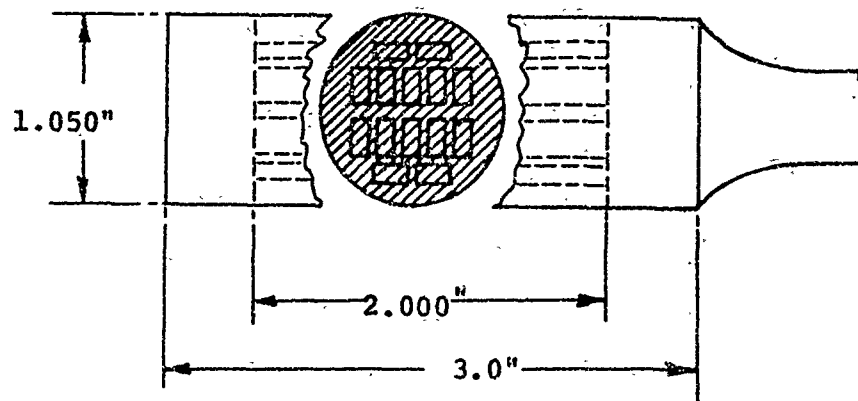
Cutting Plan for Ends of Blanks 3A05-024, 3A05-025, 3A05-028, 3A05-031, and 3A05-035 Used for Machining Study
